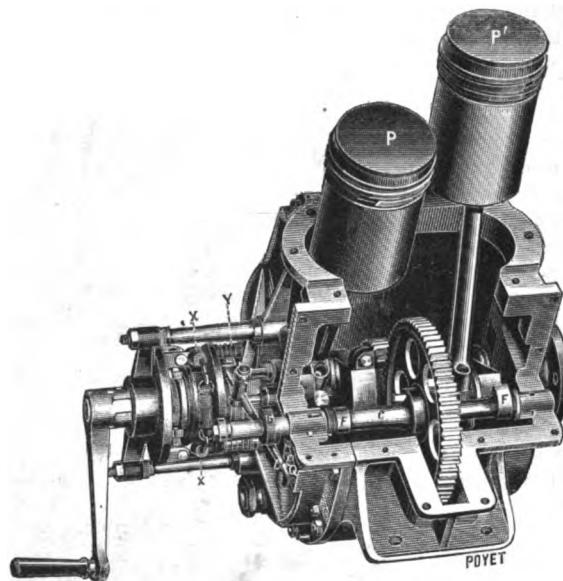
SECTIONAL VIEW OF ROCHET MOTOR.
